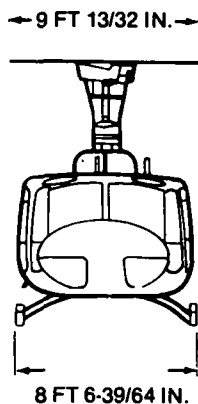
Principal Dimensions, EH-1H (Quick fix)
